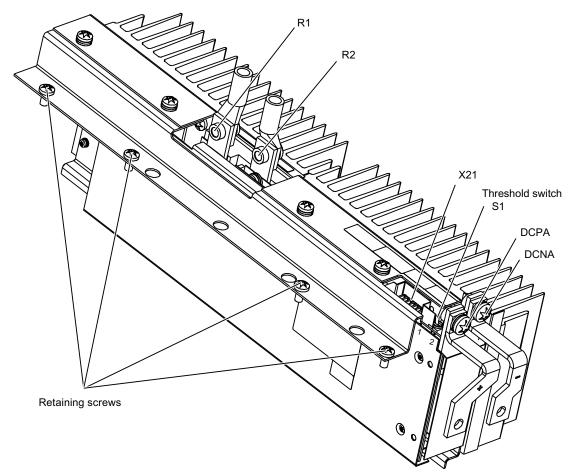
Braking Module for Smart Line Module / Active Line Module / Motor Module, frame sizes HX and JX
